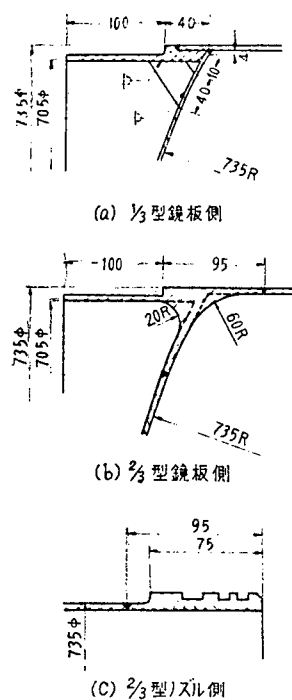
Design for welding the aft end of the L-735 type chamber. (a)—Side view of the deflecting plate of 1/3 type booster; (b)— Side view of the deflecting plate of 2/3 type booster; (c)—Side view of the nozzle of the 2/3 type booster
